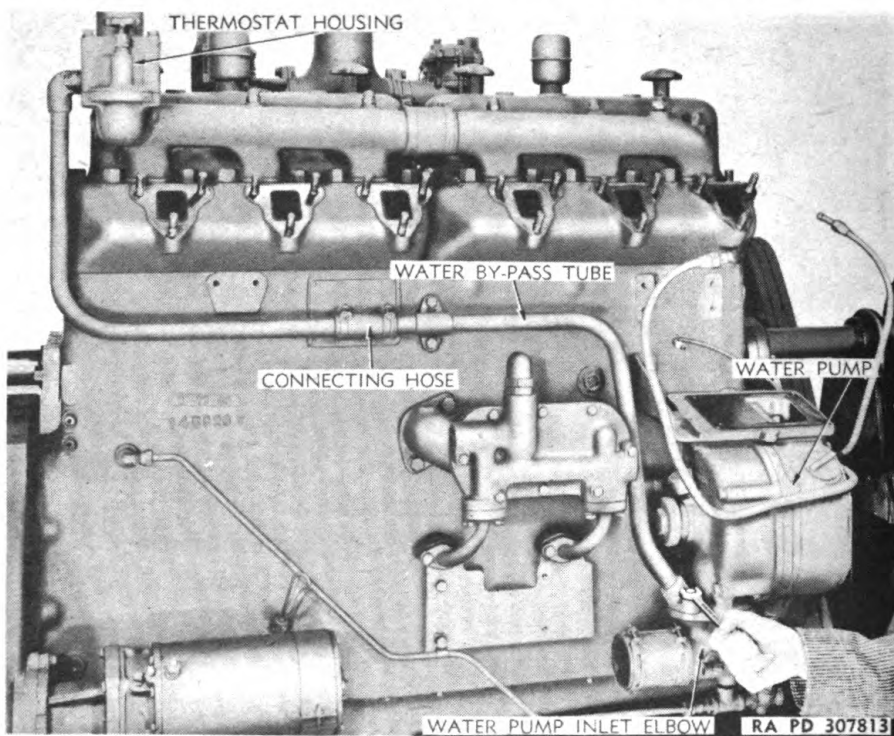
Disconnecting Water By-pass Tube at Water Pump
